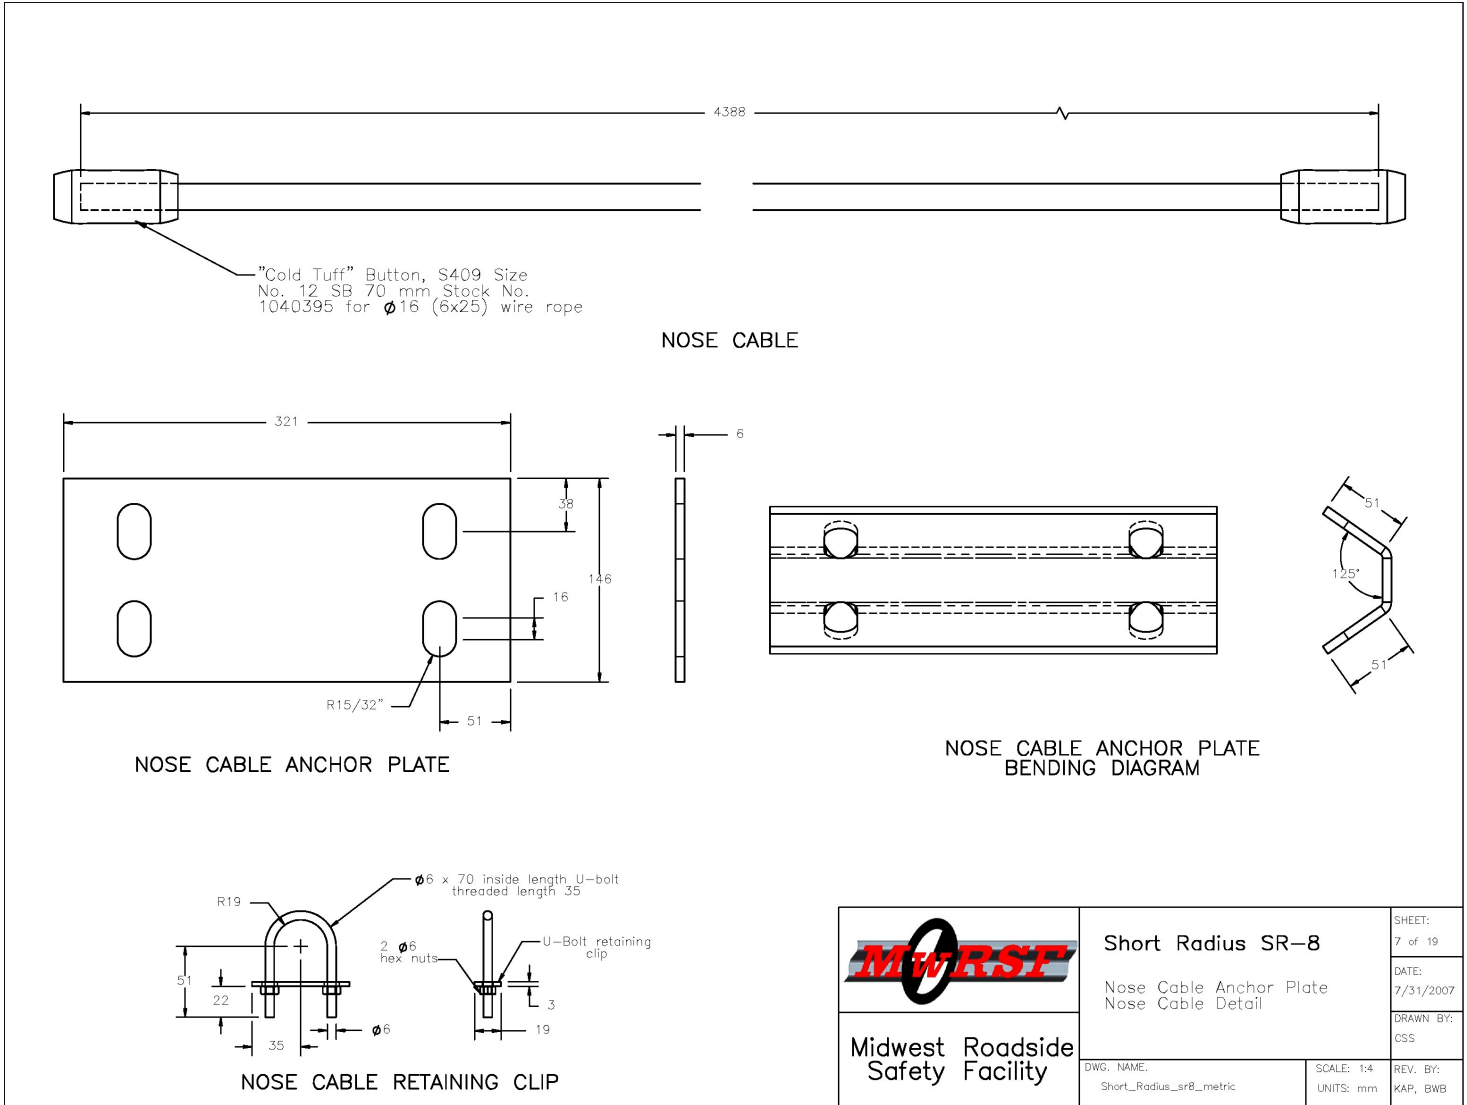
Nose Cable Anchor Plate and Nose Cable Detail
